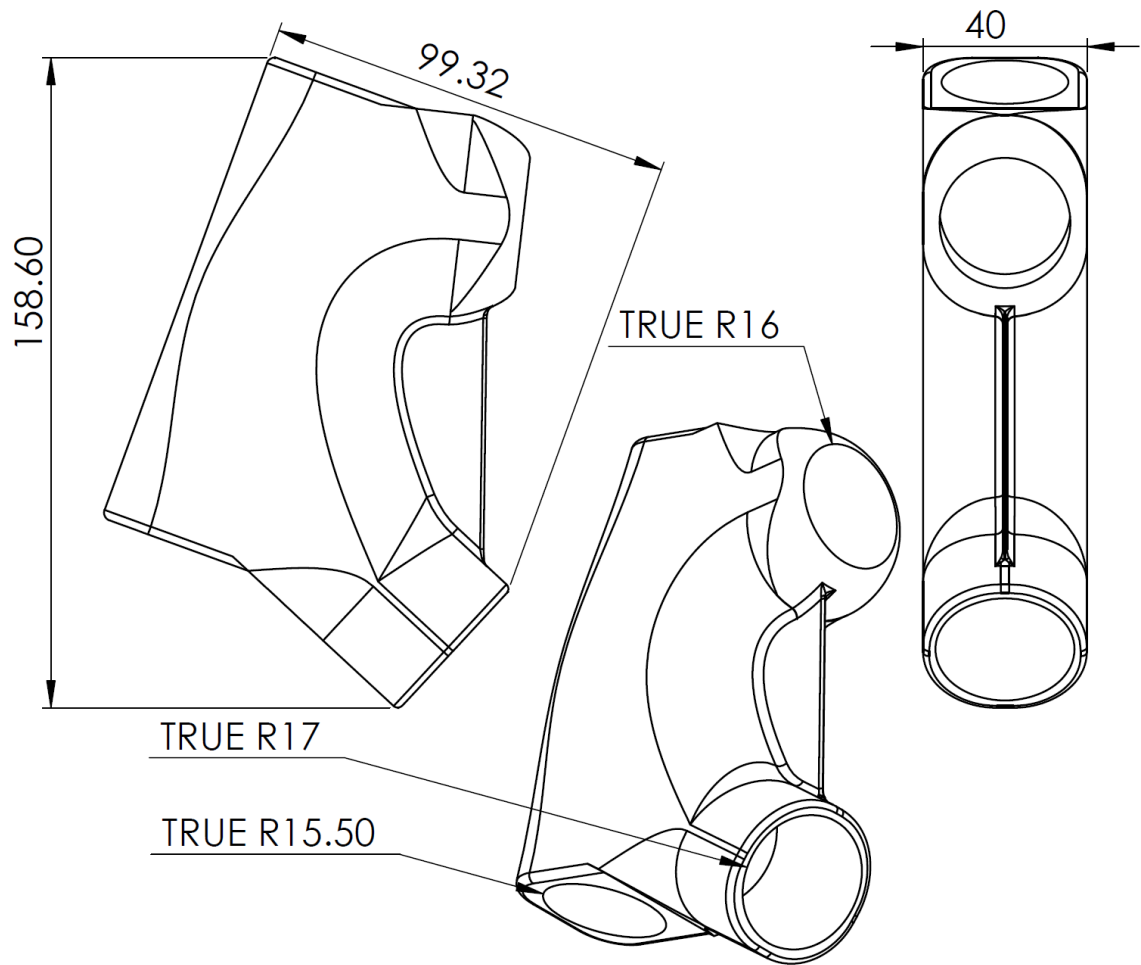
Head tube with integrated lugs schematic, showing the overall dimensions of a demo head tube and lugs combined piece.
